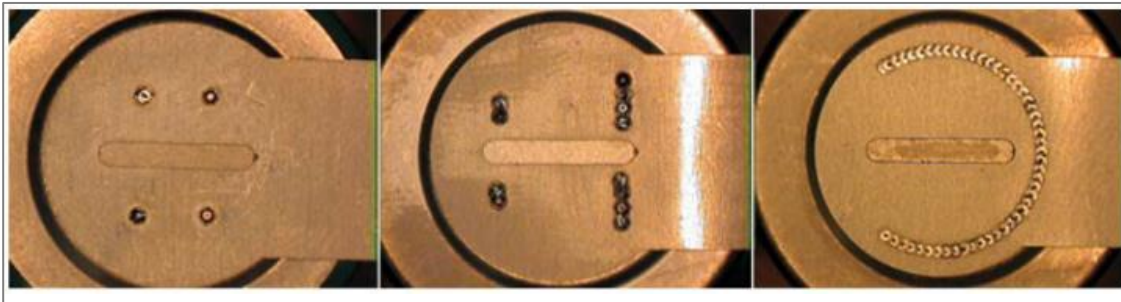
Connections between busbar and cylindrical cells using laser welding<sup>47</sup>
